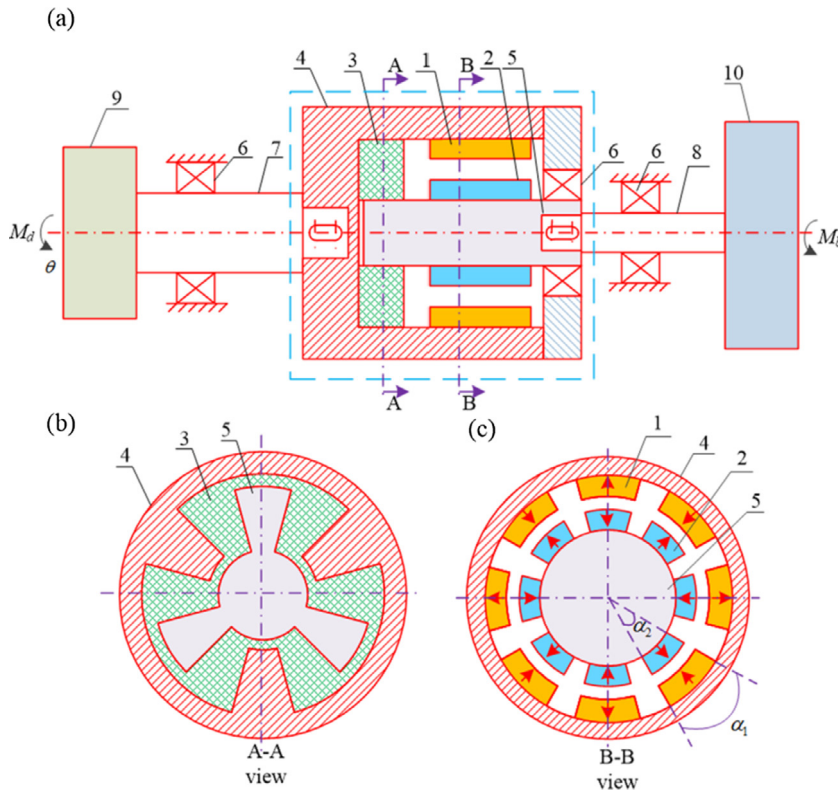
(a) Schematic of the QZS coupling (the components in the dashed box compose the coupling); (b) A-A view is the cross-section view of the rubber spring; (c) B-B view is the cross-section view of the TMS (torsion magnetic spring): 1-outer magnet arrangement of the TMS; 2-inner magnet arrangement of the TMS; 3-rubber spring; 4,5-connectors; 6-bearing; 7-driving shaft; 8-driven shaft; 9-motor; 10-rotor.
